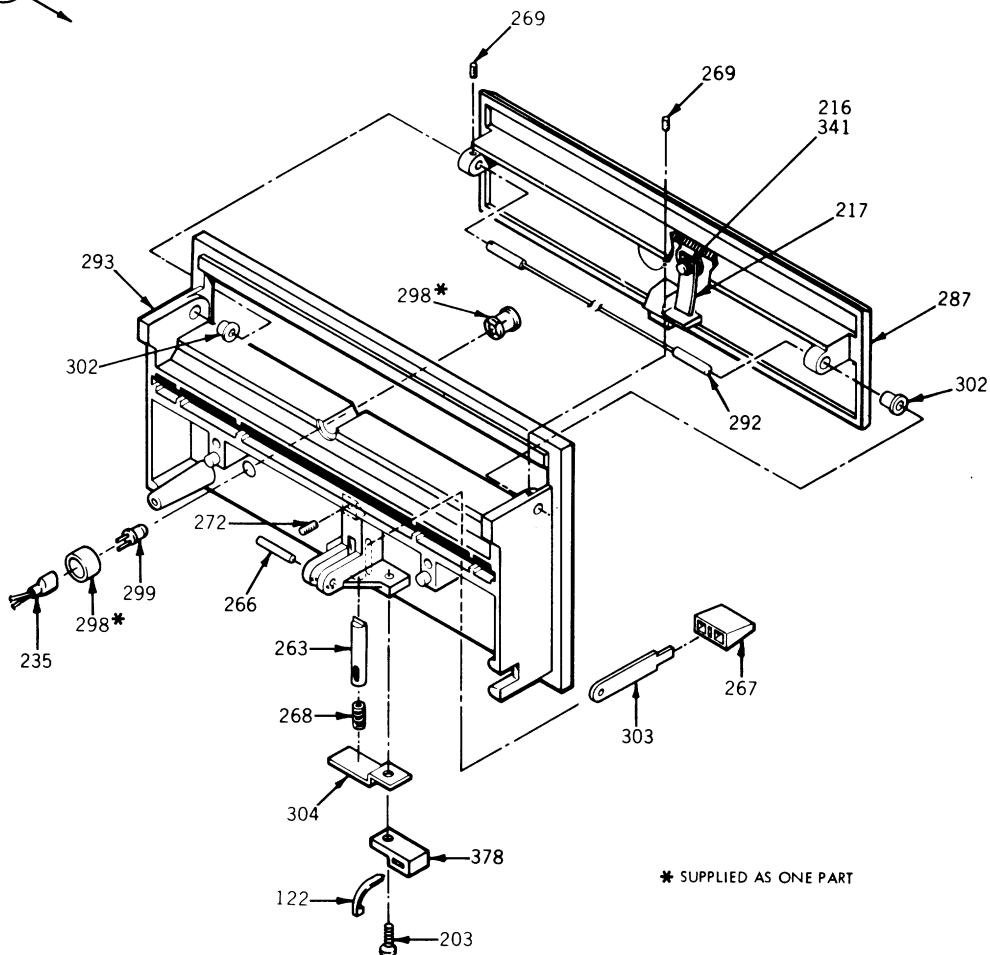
Front Panel Assembly (Sheet 1 of 2)
